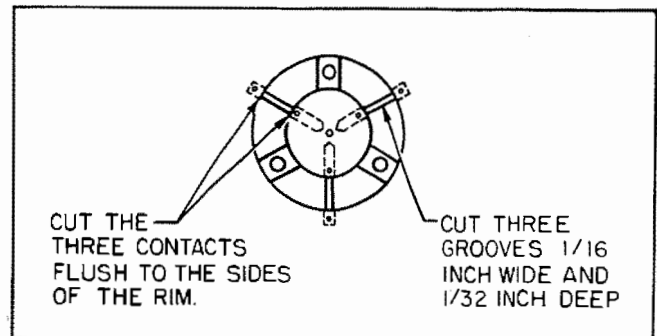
B. Method of Reworking Contact Assembly (Part No. 234843)
